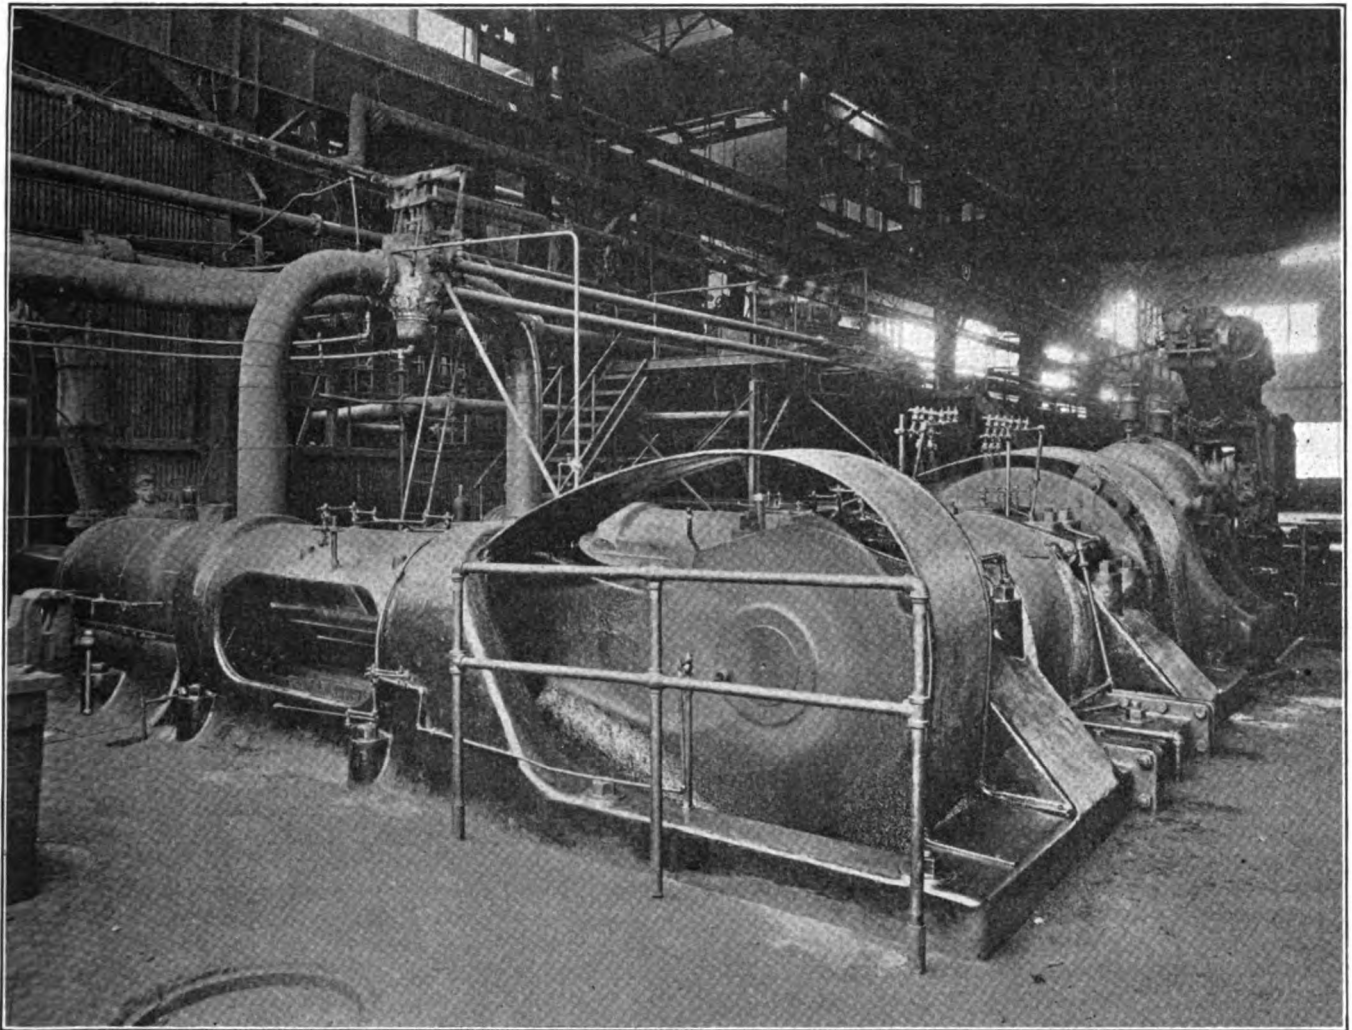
Former blooming mill engine. This 28-in. x 33-in. twin reversing steam engine of 1350 h.p. has been replaced by the electric motor shown.
